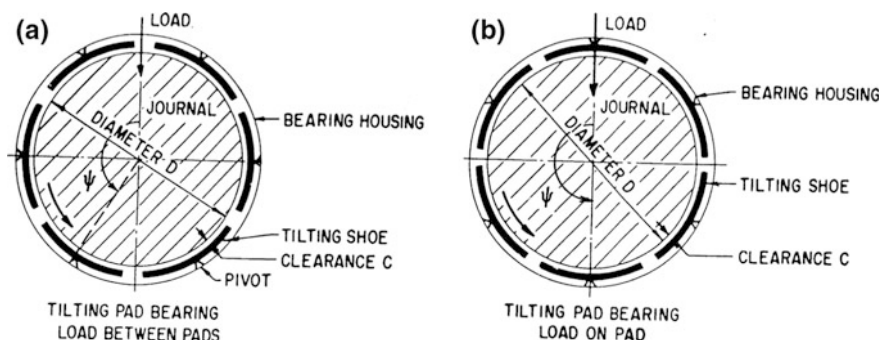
Six-pad tilt-pad bearing (Courtesy of Siemens)
